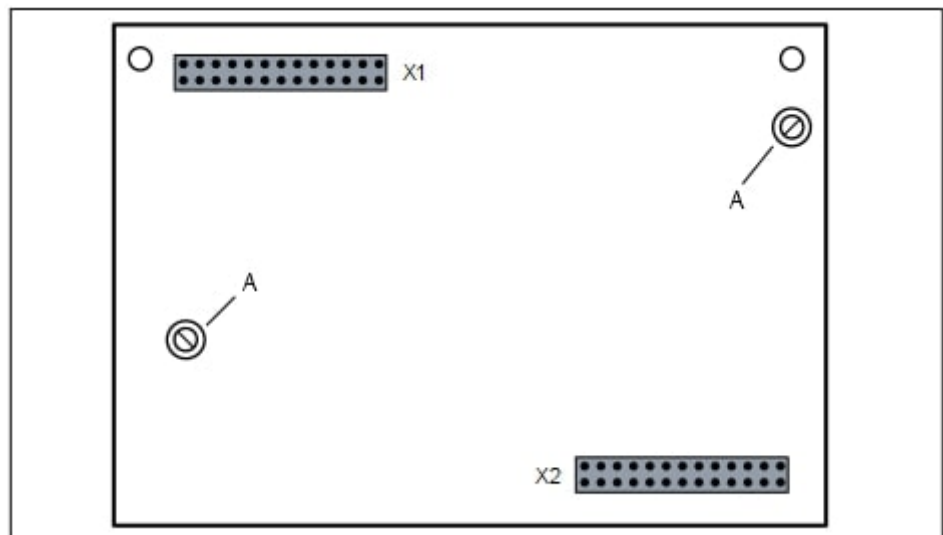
CMAe - Component side with inserted spacing bolts (A)
